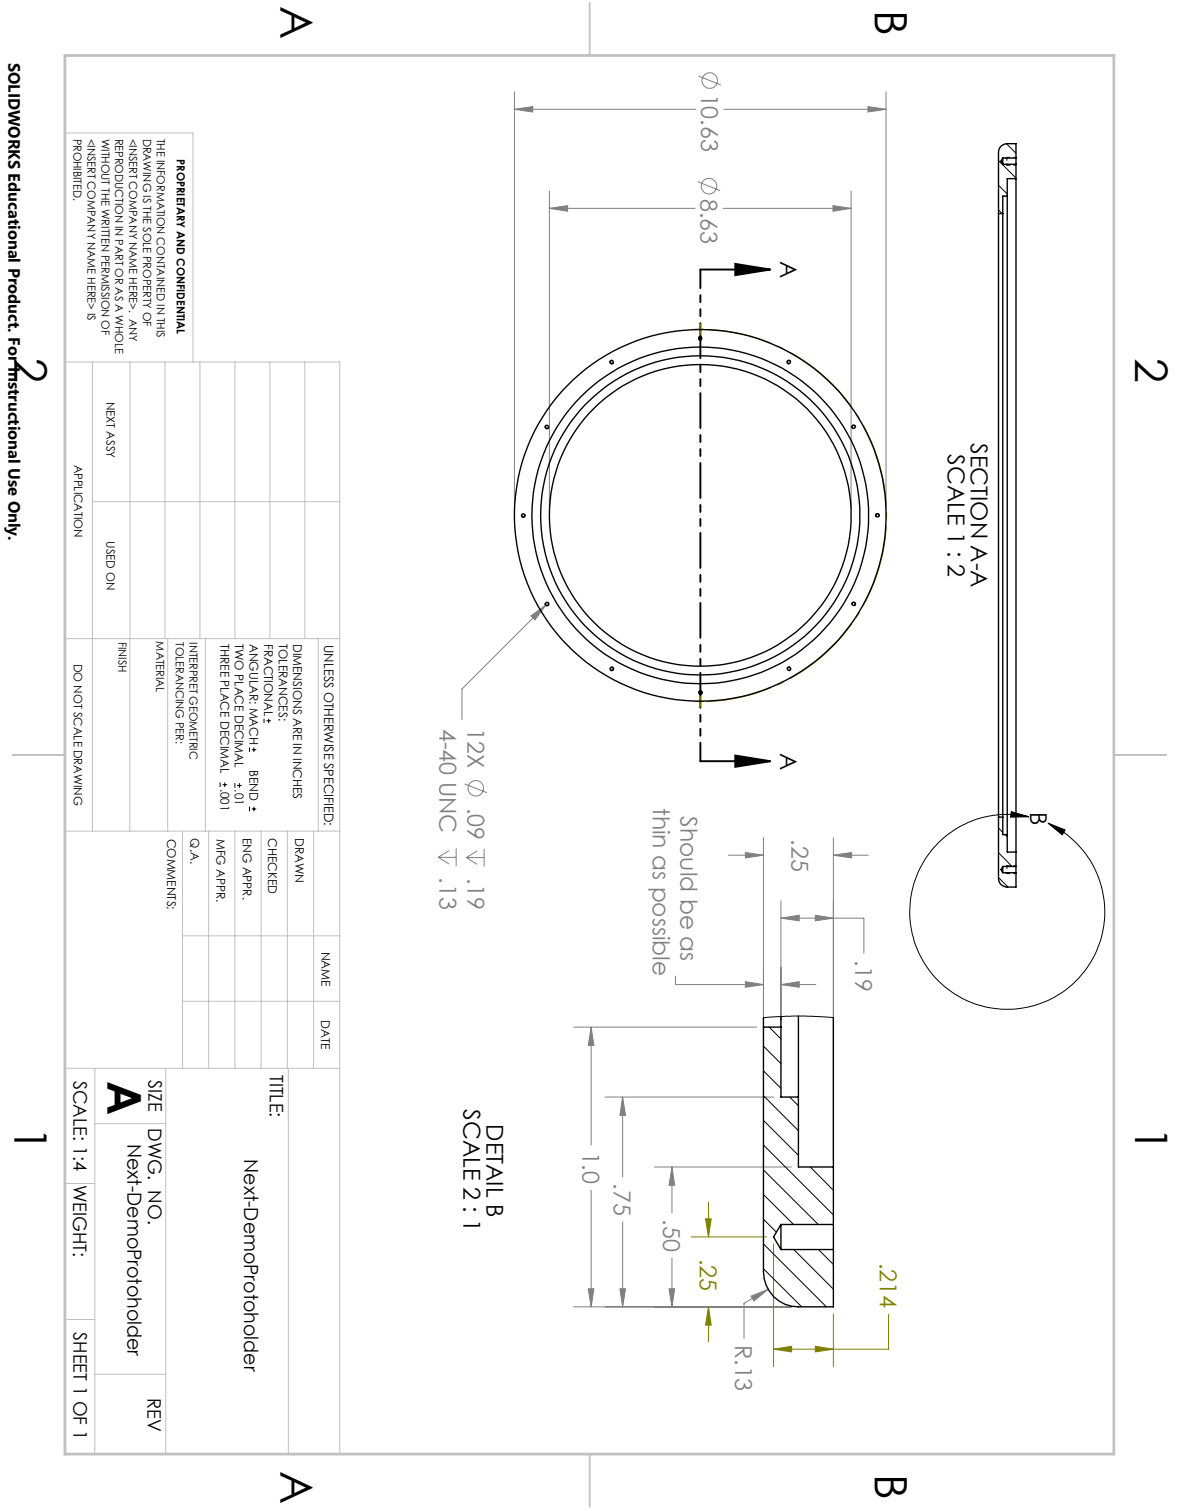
Machine drawing for manufacturing the Anode Electrical connection ring for DEMO++.
